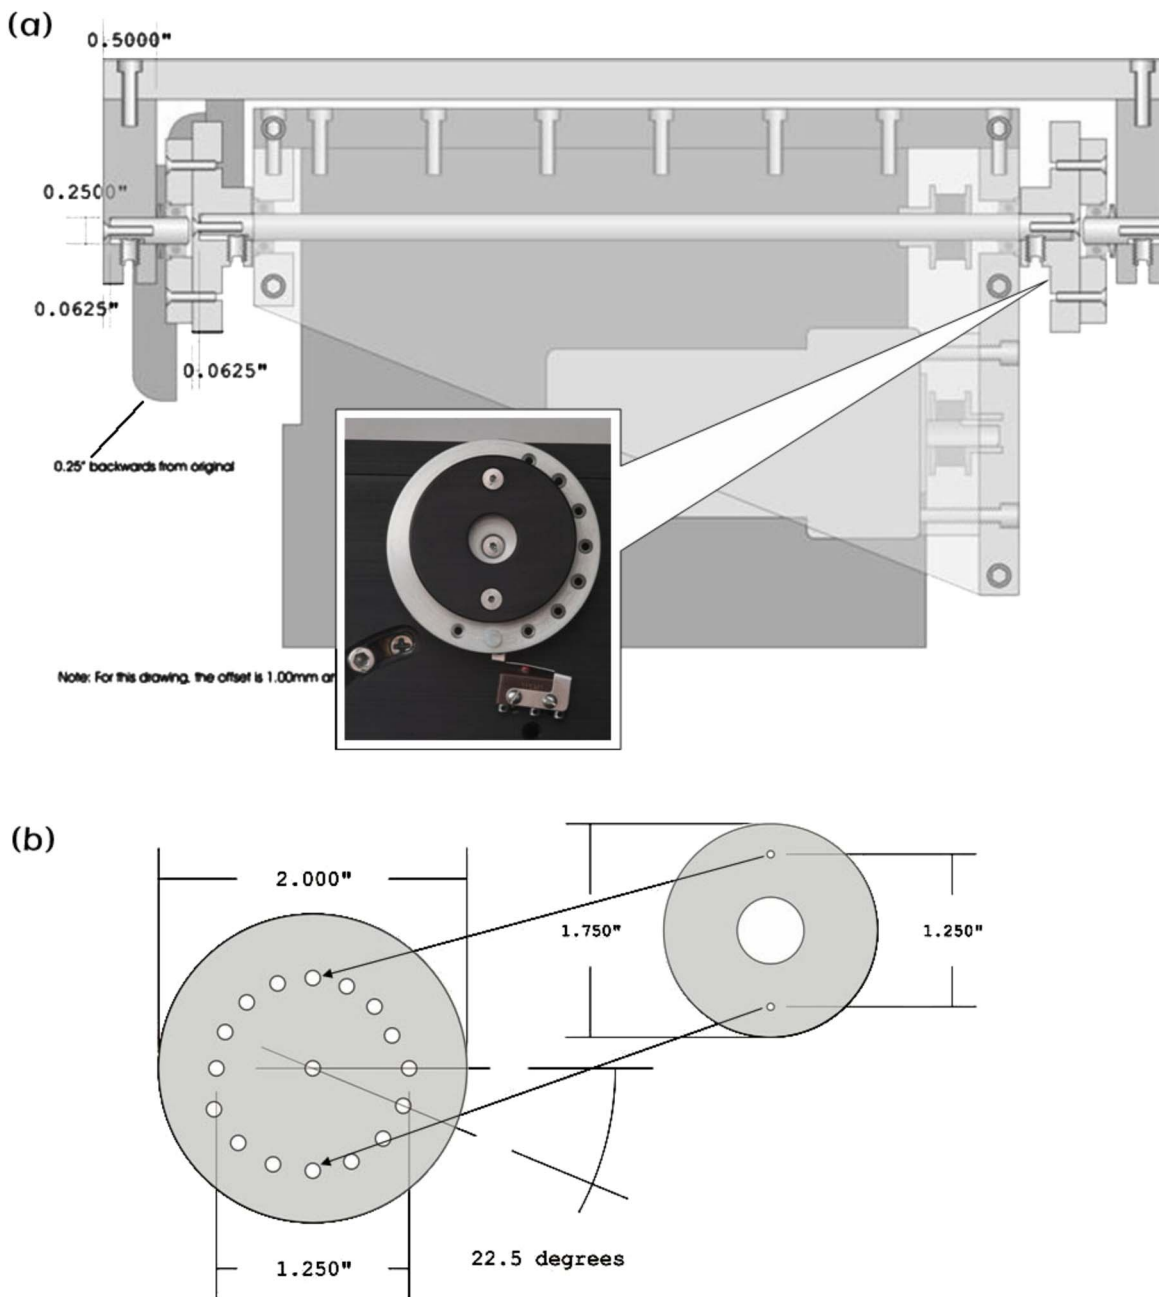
(a) Schematic of wobble mechanism. (b) A detail drawing of two eccentric wheels.
